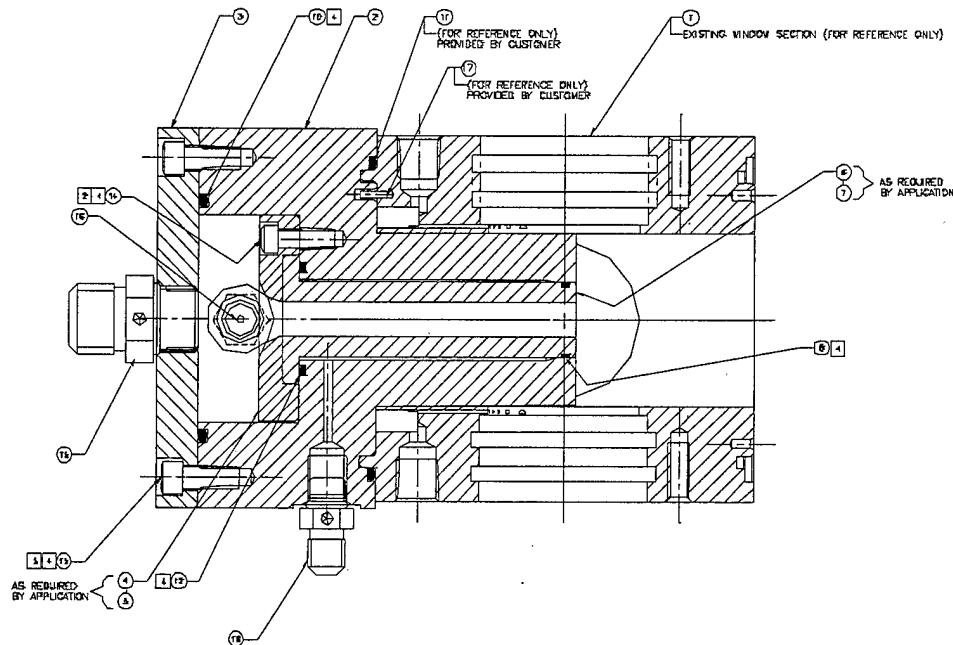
Detail of Sierra Uni-Element Test Injector Assembly
